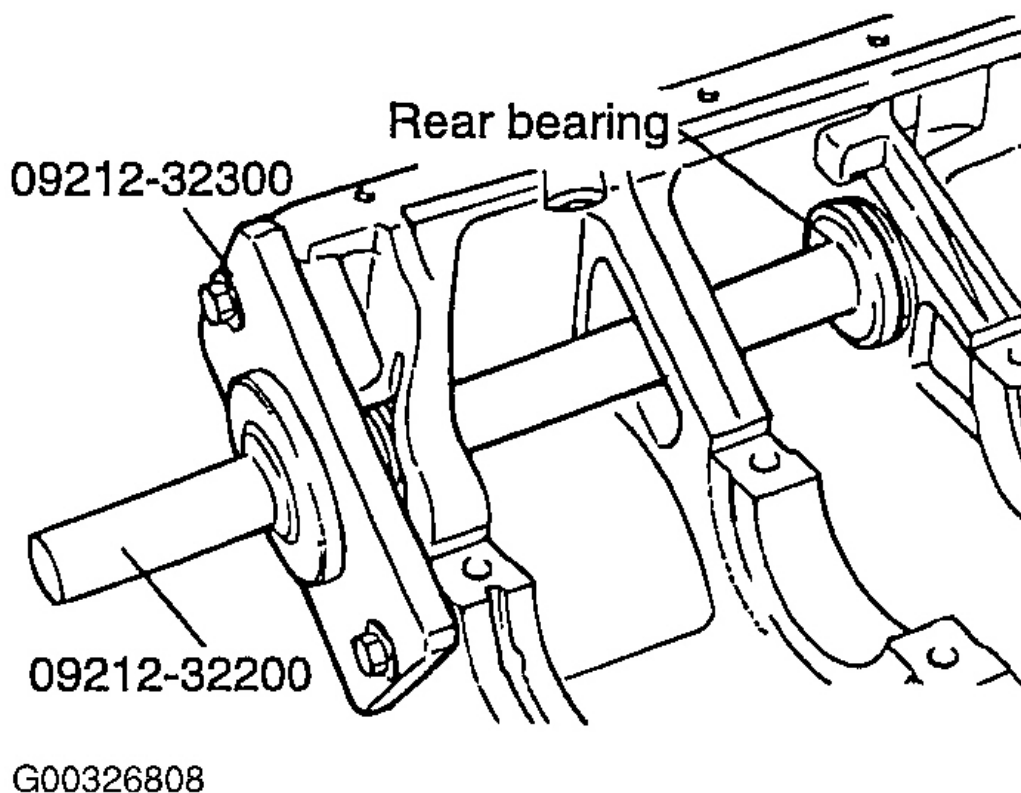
Installing Left Counter Balance Shaft Rear Bearing
